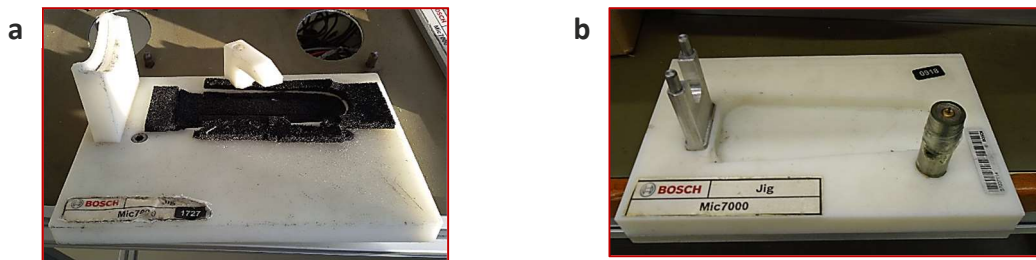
a) Fixture used to tight the arms; b) Quality fixture to check the tilt gear position.
